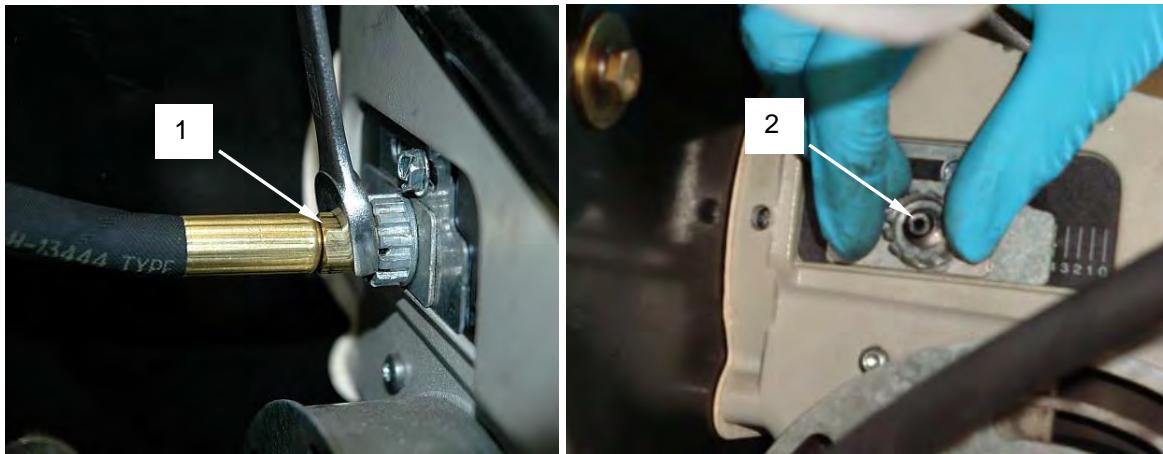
Installing Fuel Line onto Fuel Line Tube.
